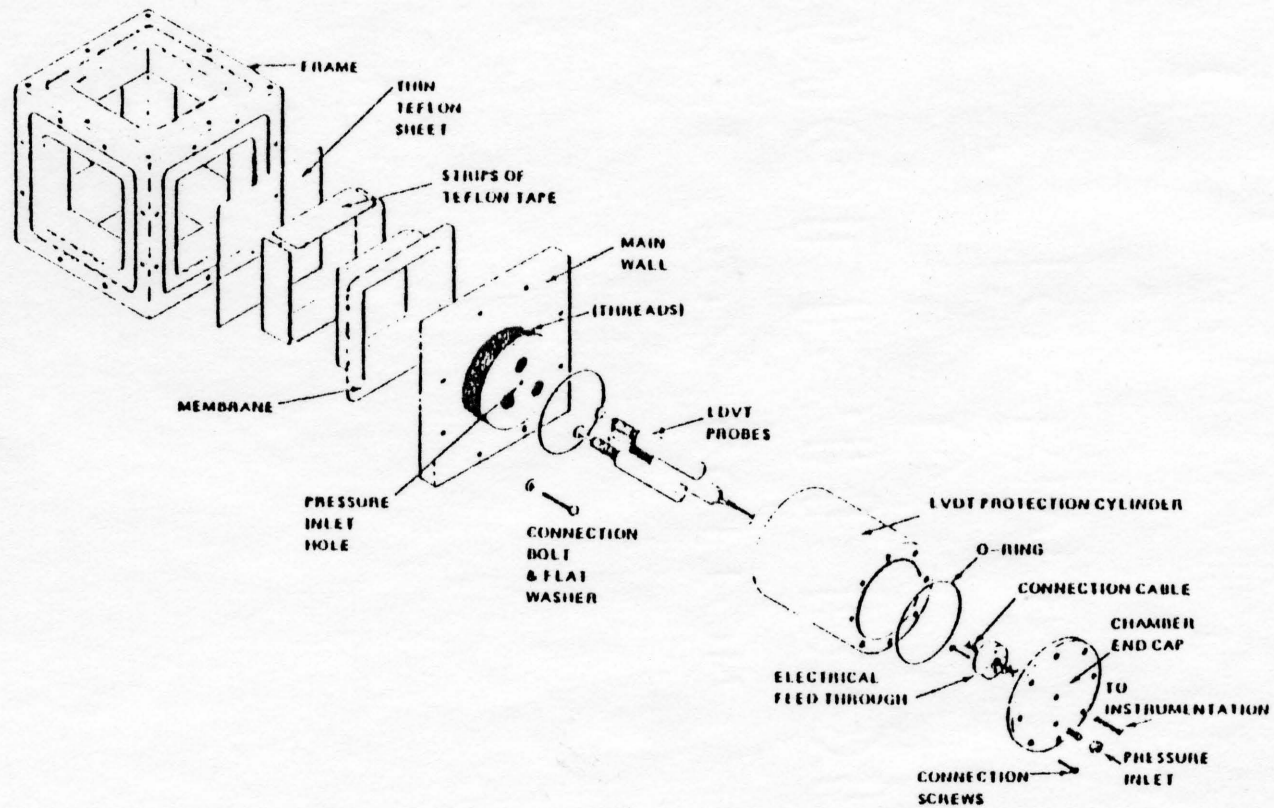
Exploded View Showing One Face of the Multiaxial Cubical Apparatus
